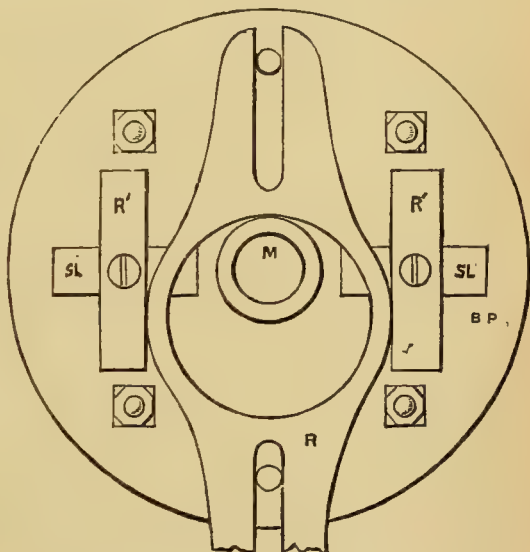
BACK VIEW OF OVAL CHUCK.
